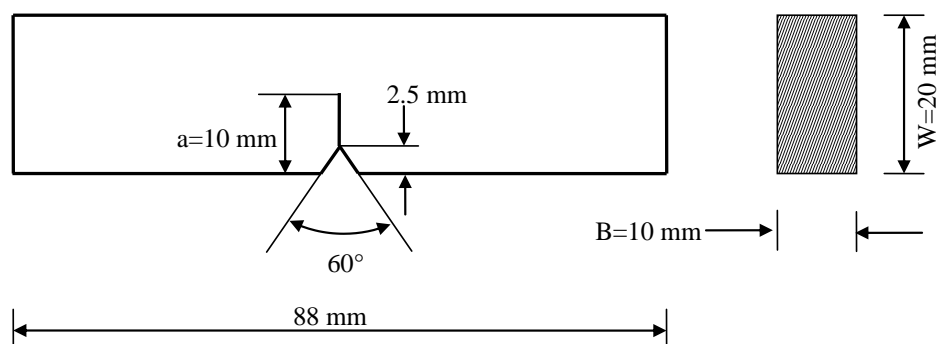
Single Edge Notch Bending (SENB) specimens used in the tests.
